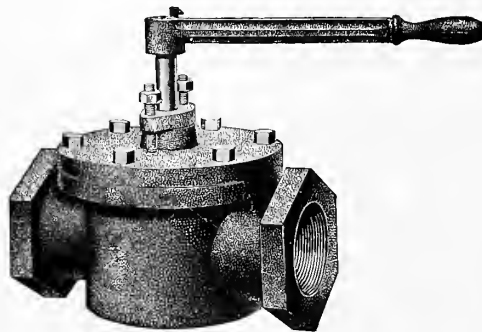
THROTTLE VALVE, SCREWED ENDS.
